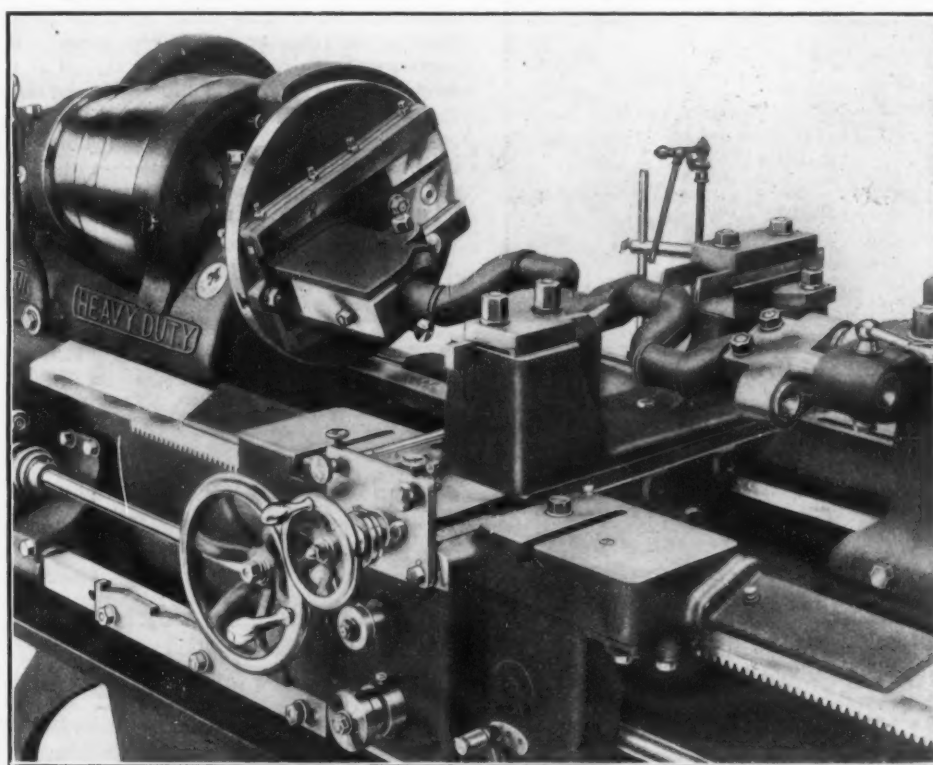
A Detail of the Work-Holding Fixtures and Carriage of the Specially Equipped Lathe
